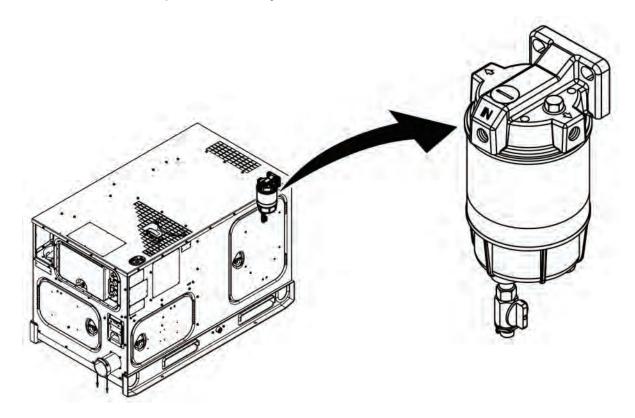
Fuel Filter/Water Separator Assembly — Location.
